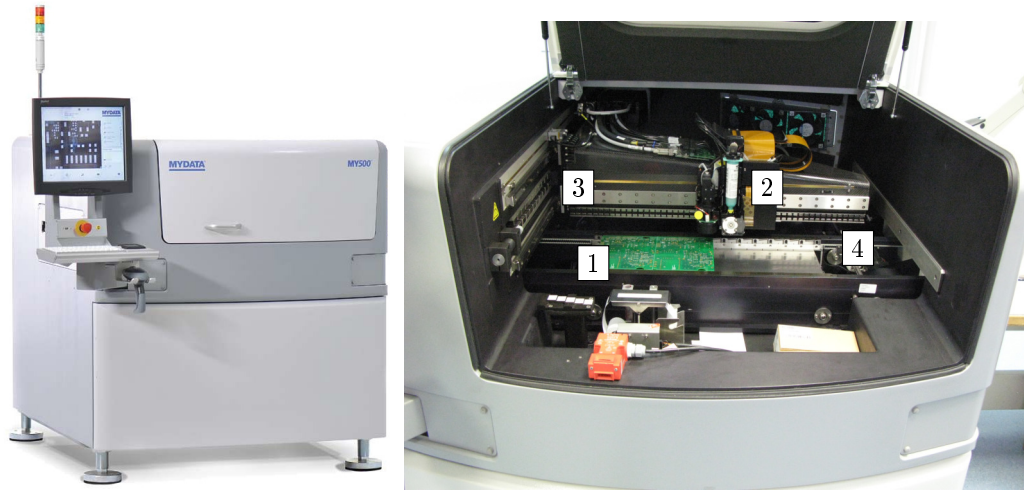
PCB Jet Printer: left: Photograph of the My500 jet printer [Myd10a]; right: Photograph of an opened jet printer: 1 - PCB, 2 - cassette, includes ejector and cartridge, 3 - T-shaped motion system, 4 - conveyors.
